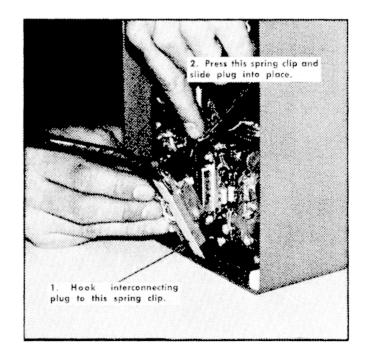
Securing the power cable to the power supply for remote operation.
